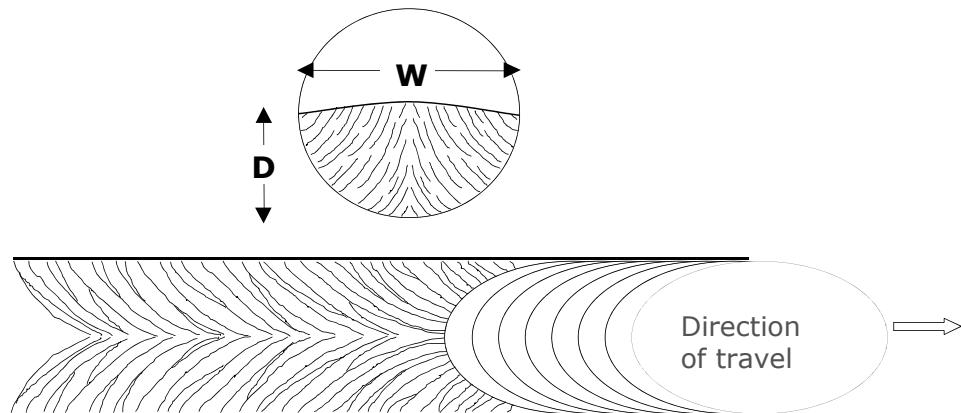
shows a weld bead that has solidified under unfavourable welding conditions associated with centreline solidification cracking.
